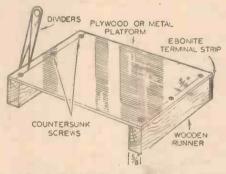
A strong and easily-made chassis. Note the method shown for drawing lines parallel to the edge.
